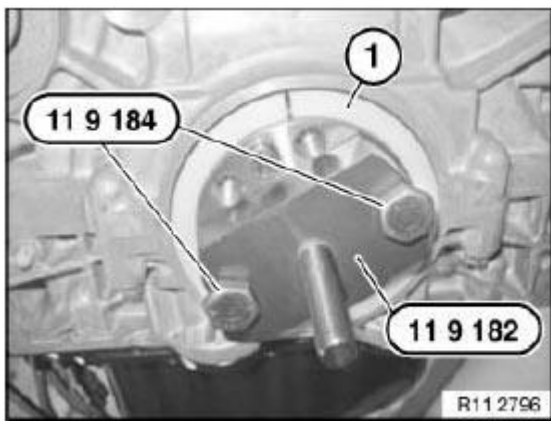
Identifying Spacer Ring And Special Tools (11 9 182, 11 9 184)
